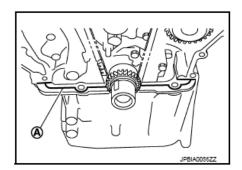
Identifying Liquid Gasket Applying Dimension Of Oil Pan (Upper) Courtesy of NISSAN MOTOR CO., U.S.A.
